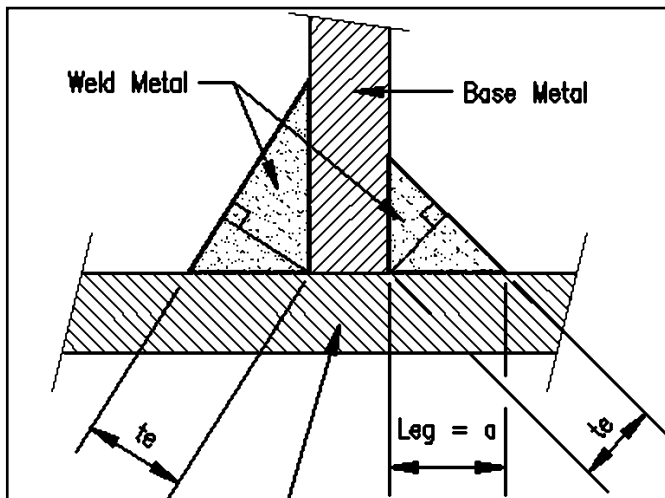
Fillet Weld Sectional Dimensions
